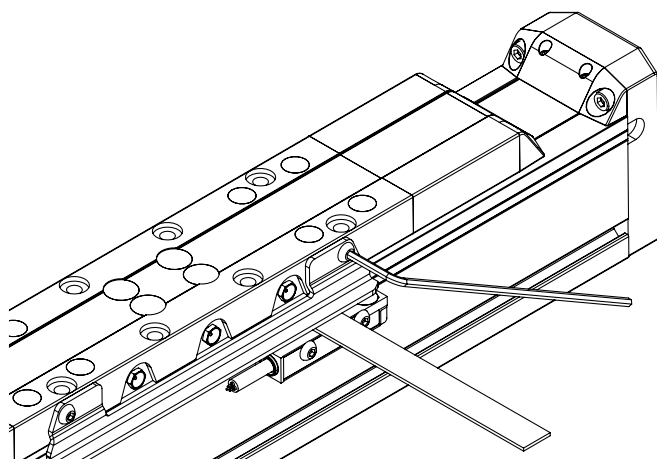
Setting the switching distance with a feeler gauge, and tightening the bolts
